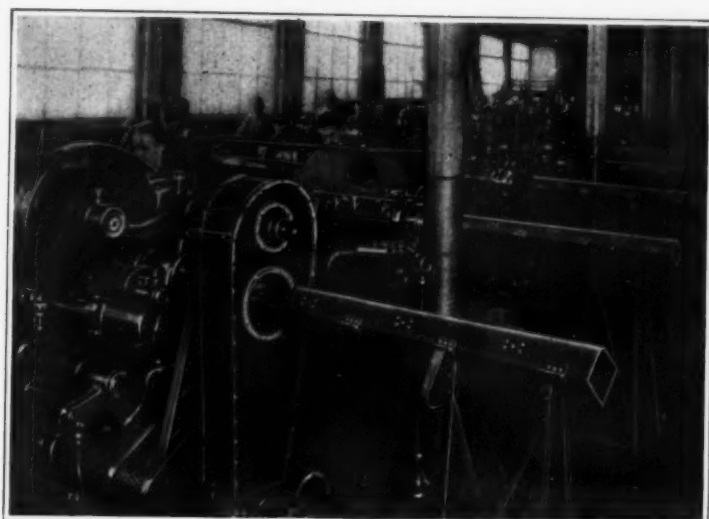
Slicing lathes with protecting devices over the rods of rotating material.
